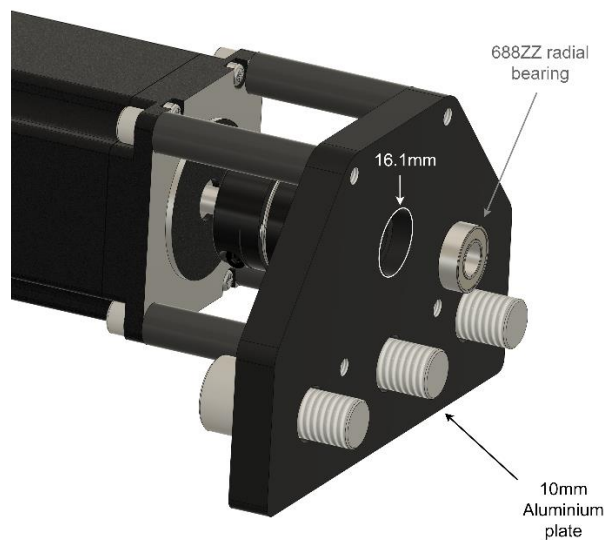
Stepper motor plate mounting, illustrating the 688ZZ radial bearing hole at 16.1mm, where the bearing is press fitted.
